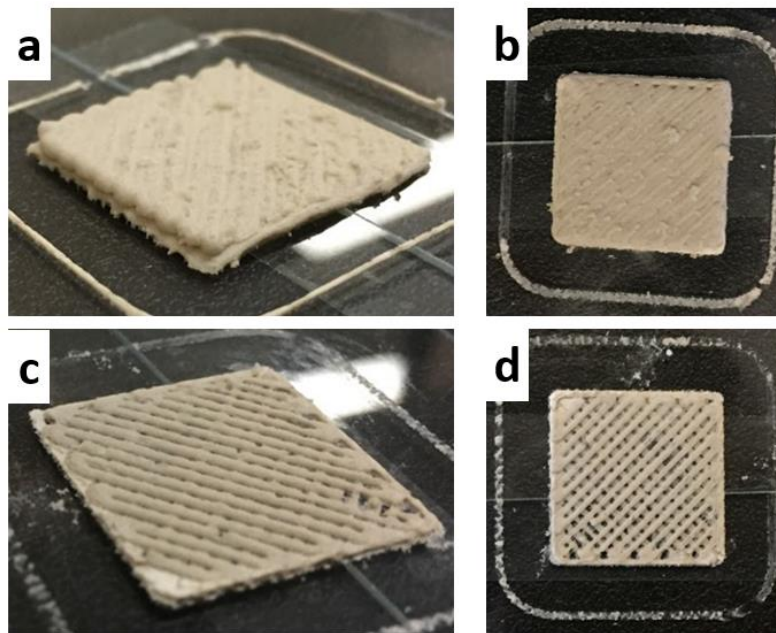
Photographs of 3D printed AgNW/CMC. (a) Isometric view, (b) top view of part with 100 % infill, (c) isometric view, and (d) top view of part with 70 % infill.
